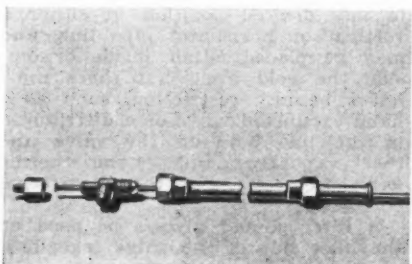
Insert inner tube in outer and slip one "T" connection at one end. Flare inner tube at this end with ordinary flaring tool.
